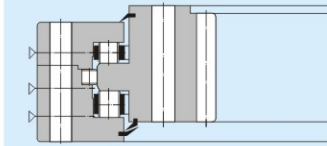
Three-row cylindrical roller combined bearing with internal gear
